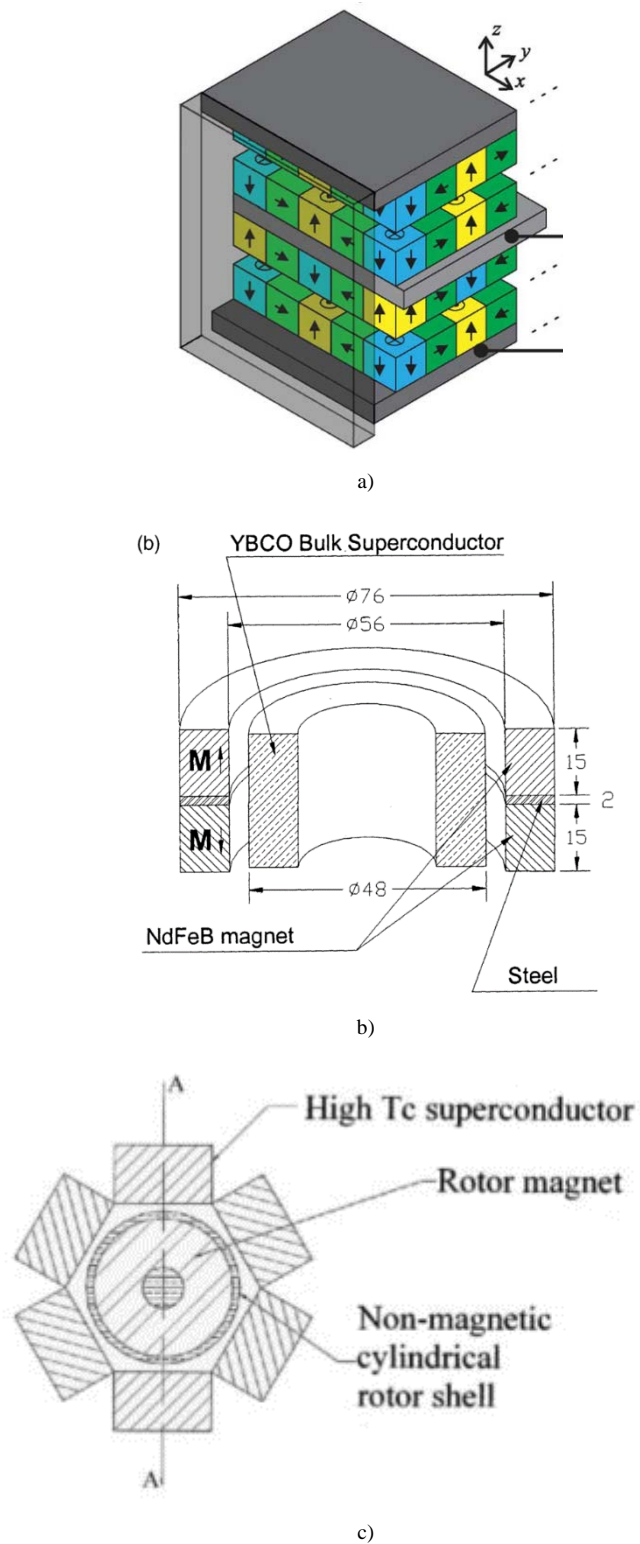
Rotary Magnetic Bearings using EDS. a) PM-PM ; b and c) PM- HTSC
